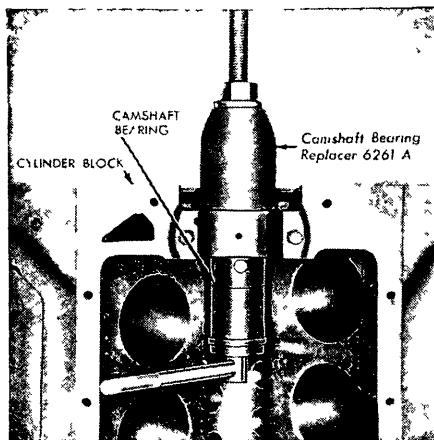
Installing camshaft bearings, 1935-52 V8 Ford and Mercury
